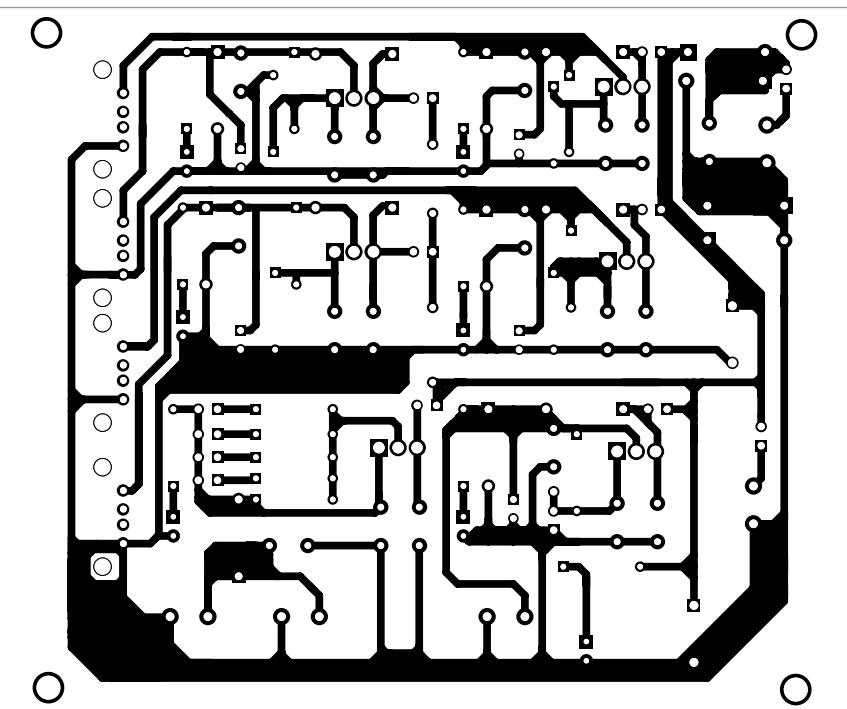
Actual-size PCB layout of the power supply hub with quad-USB outputs
